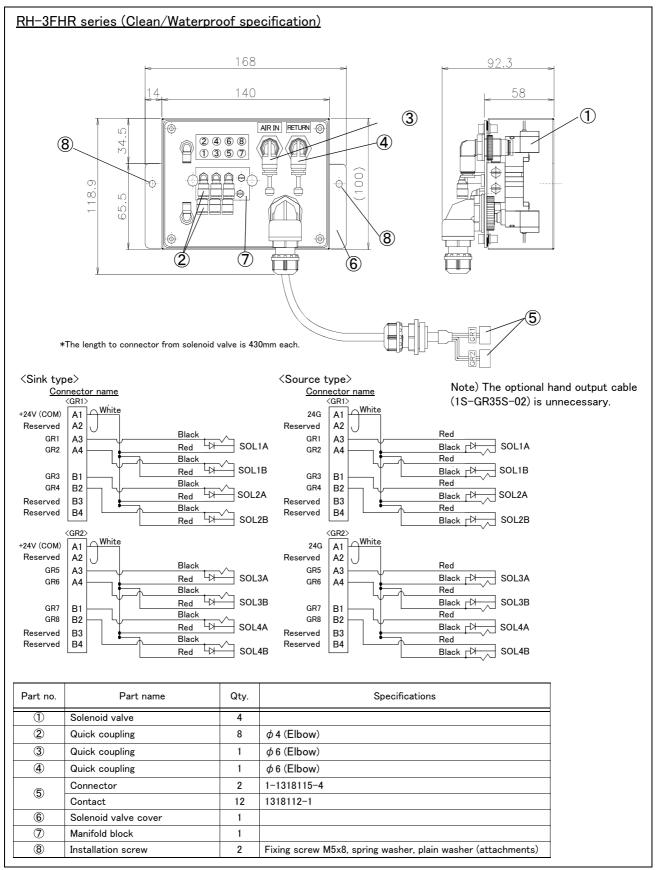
Outline dimensional drawing (RH-3FHR series: Clean/Waterproof specification)
